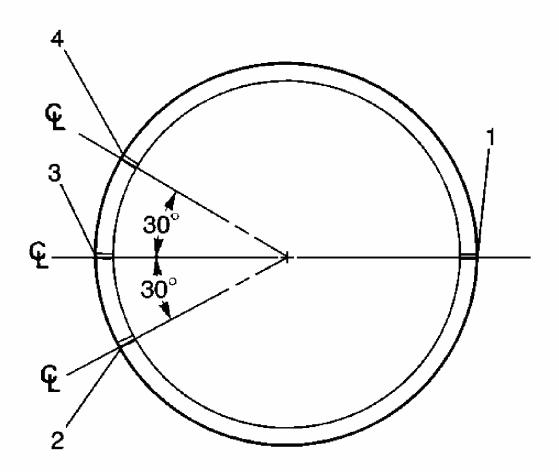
Identifying Proper Oil Control Ring Gap Positioning Courtesy of GENERAL MOTORS CORP.
